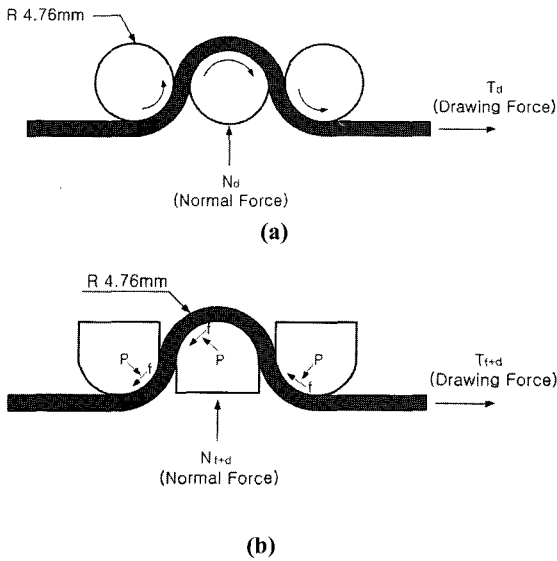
Contact aspect between bead and sheet for (a) roller bead, and (b) fixed bead
